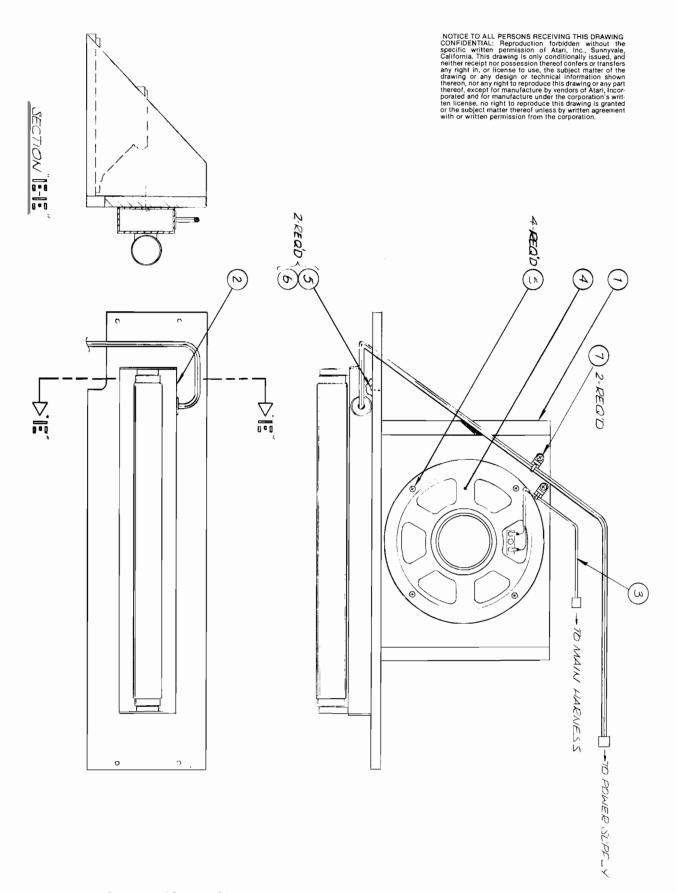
Display Assembly (Graphics) A032838-01 D
